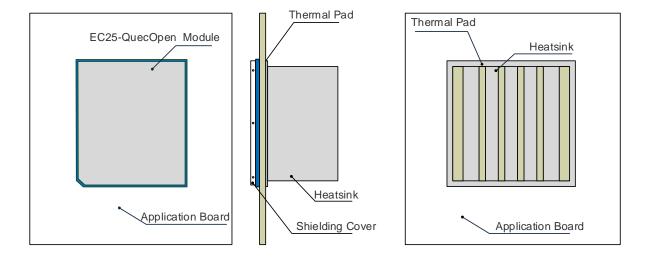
Referenced Heatsink Design (Heatsink at the Backside of Customers' PCB)
